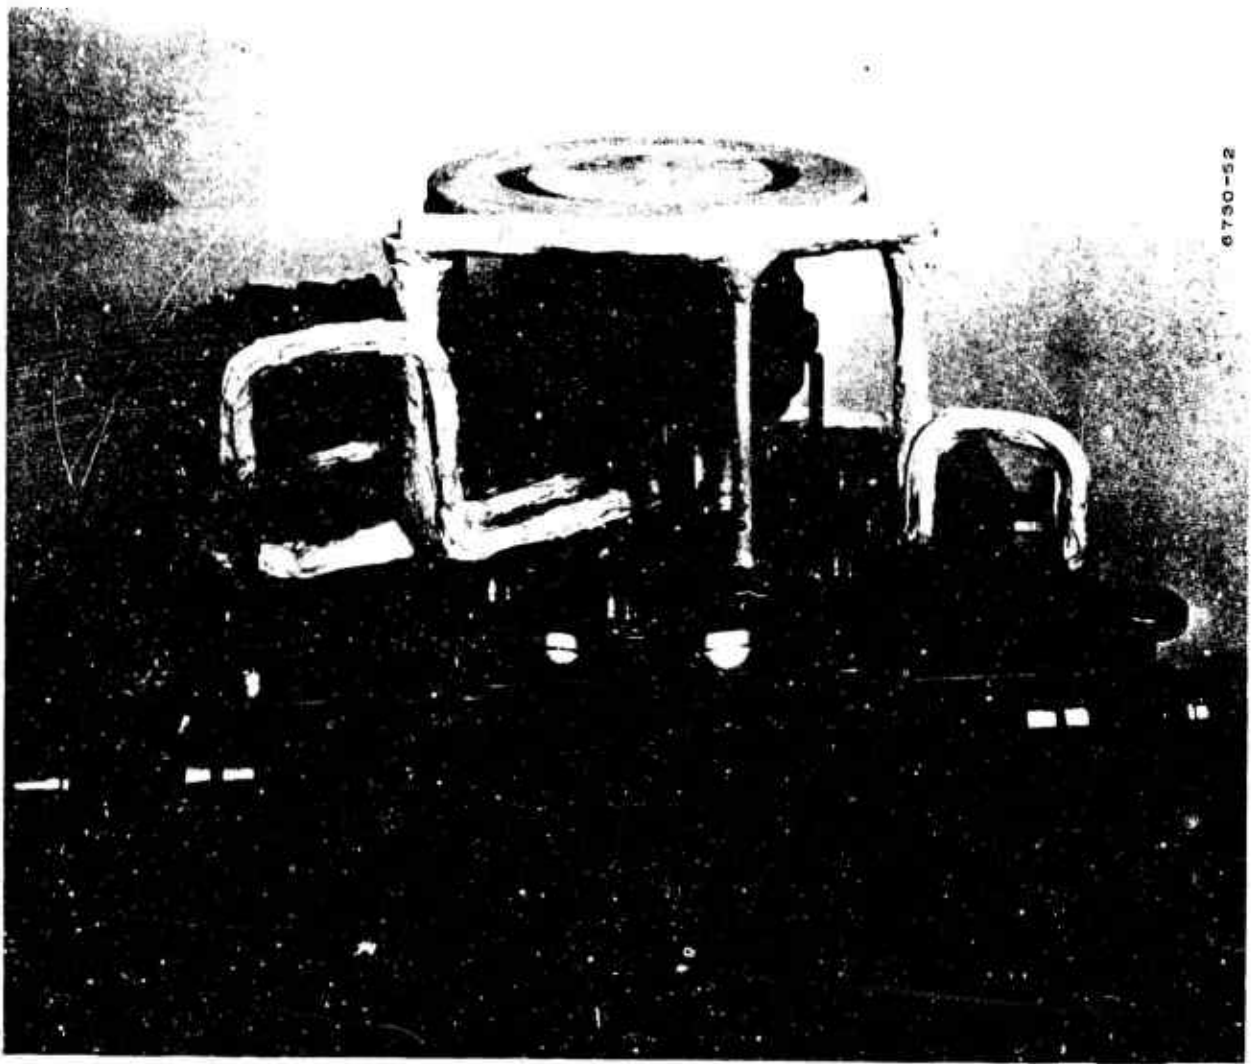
Ceramic Wafer in Mold, Mold on Vibrator
